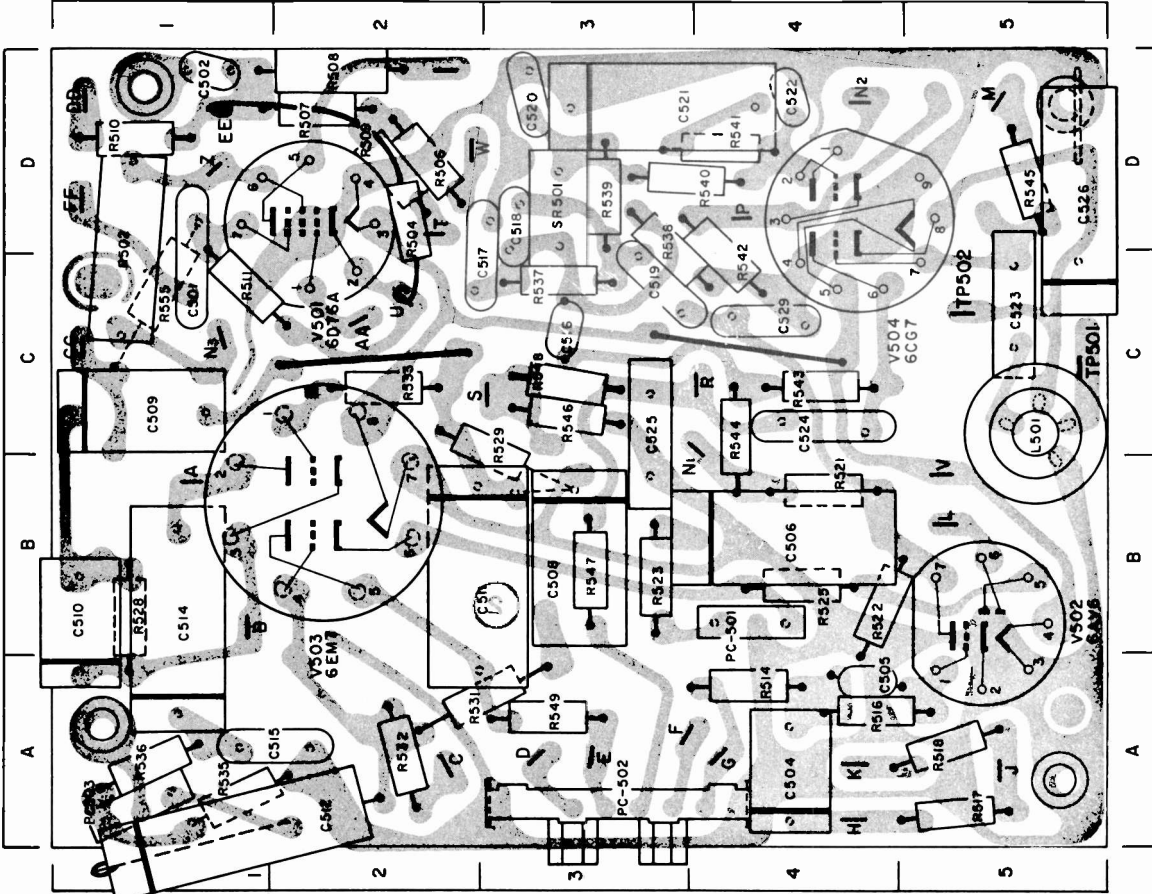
PW500 Sealed Circuit Deflection Assembly Composite Diagram
